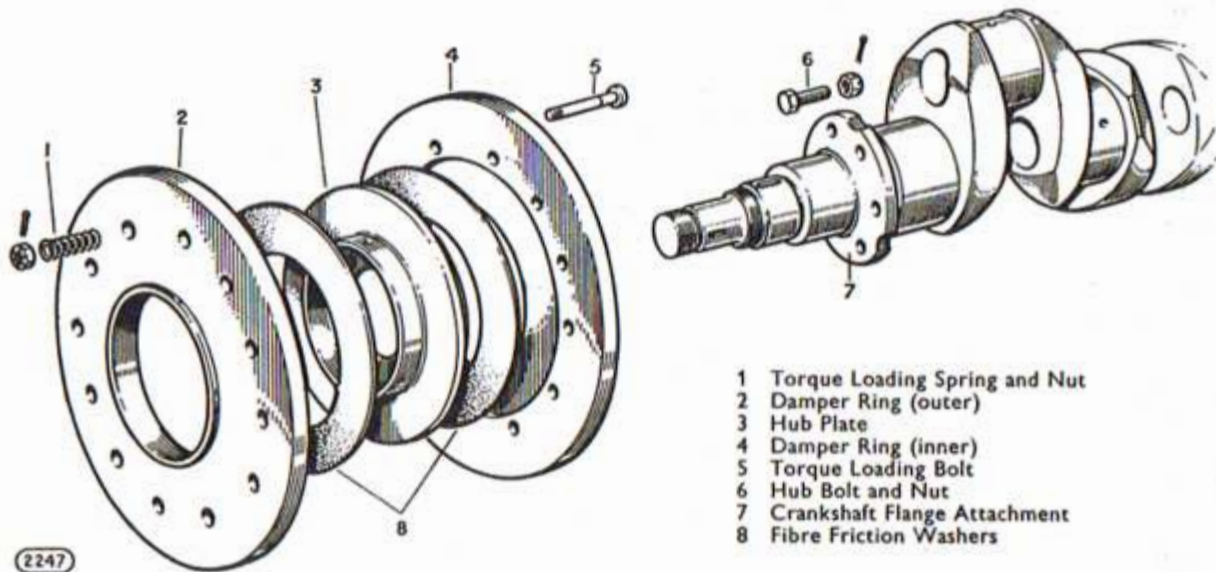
CRANKSHAFT DAMPER ASSEMBLY—TYPE 4
